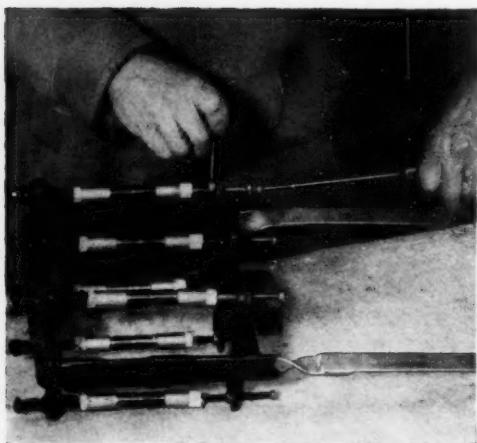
Method of Mounting Screw Plug Gauges in a Holder for Cromatrix Plating
